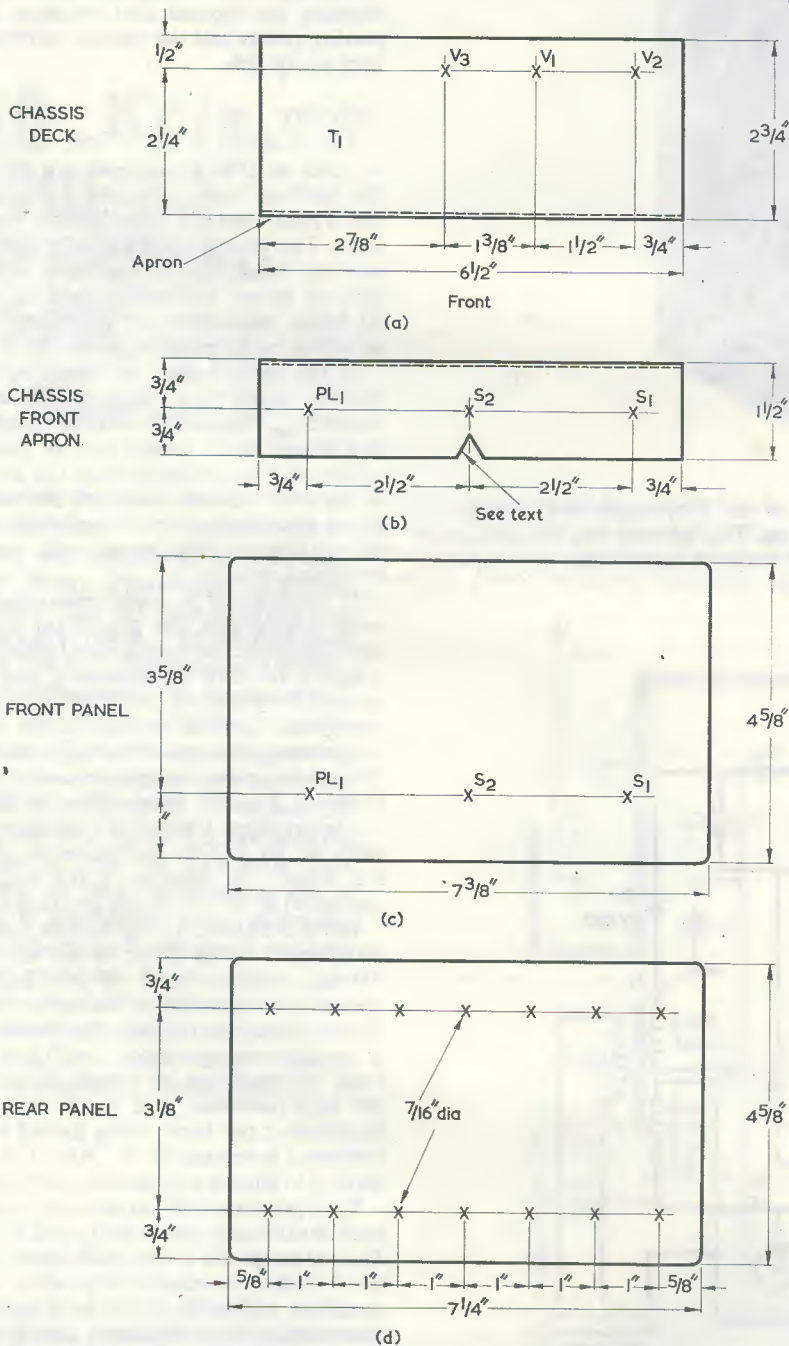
(a). Plan view of the chassis deck with drilling dimensions. The chassis is L-shaped and has only one apron. (b). Drilling dimensions of the chassis apron. The inverted V-shaped cut-out is necessary to give clearance when securing the diecast front panel to the box. (c). Drilling details of the diecast box front panel. (d). The diecast box rear panel, showing the drilling dimensions of the ventilation holes. Note here that the outside measurements of the rear panel differ from those of the front panel.
